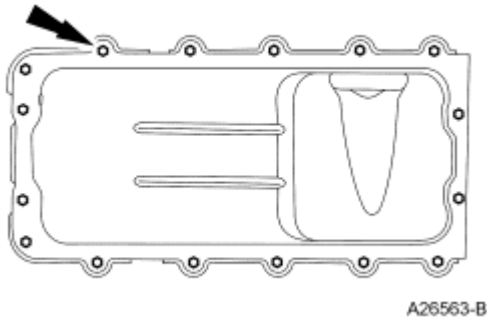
Locating Oil Pan And Oil Pan Gasket Bolts
